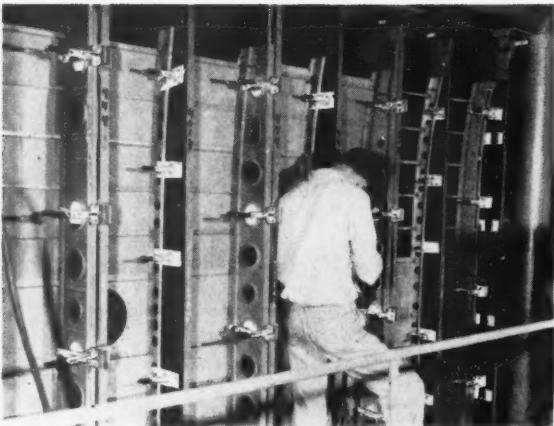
Illustration showing use of De-STA-Co toggle clamps in holding horizontal stringers, vertical frames, and beams between frames during riveting operations at Kaiser - Frazer Willow Run plant
